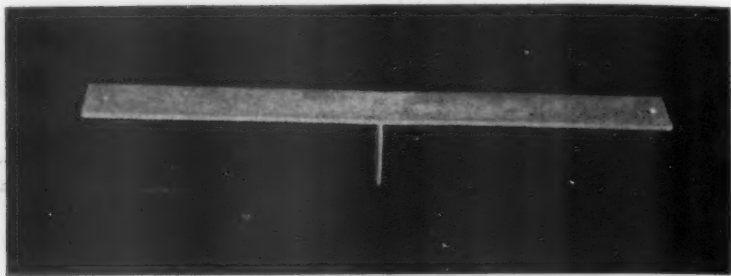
TEST PIECE USED TO COMPARE RESISTANCE TO CORROSION FATIGUE.
